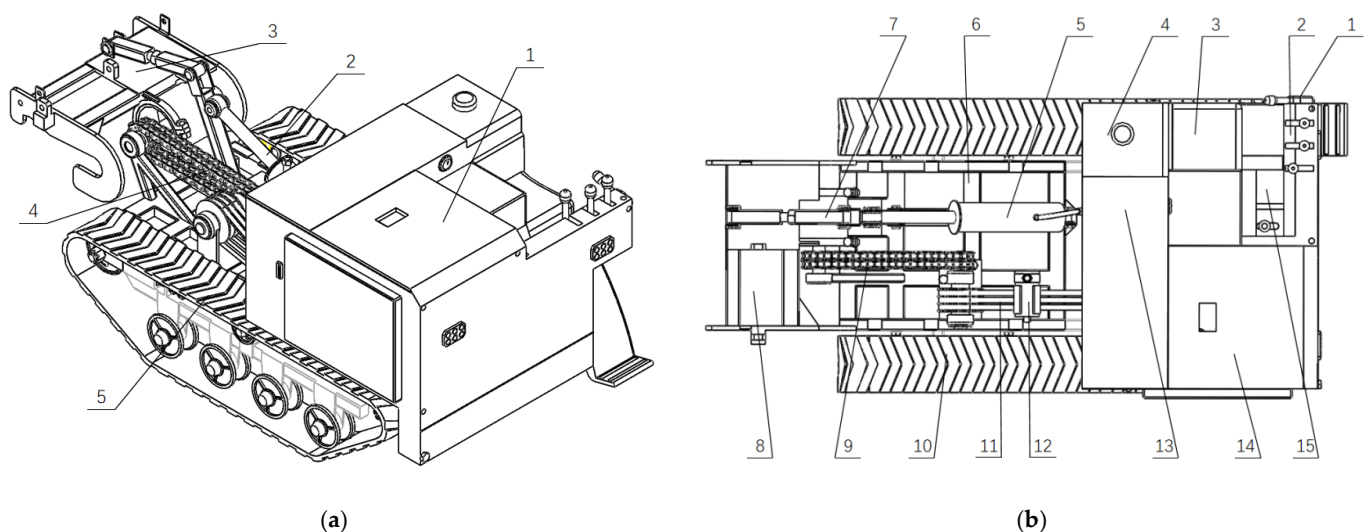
Schematic diagram of the structural layout of the whole machine. (a) Isometric diagram: (1) engine; (2) hydraulic cylinder; (3) quick-change device; (4) transmission; (5) endless track installation. (b) Top view: (1) drive wheels; (2) mechanical console; (3) driving seat; (4) fuel tank; (5) integral lifting hydraulic cylinder; (6) frame; (7) hydraulic cylinder for longitudinal depth adjustment system; (8) quick-change device; (9) double row; (10); rubber tracks; (11) belt; (12) tensioning wheels; (13) hydraulic oil tank; (14) diesel engine; (15) gear box.
